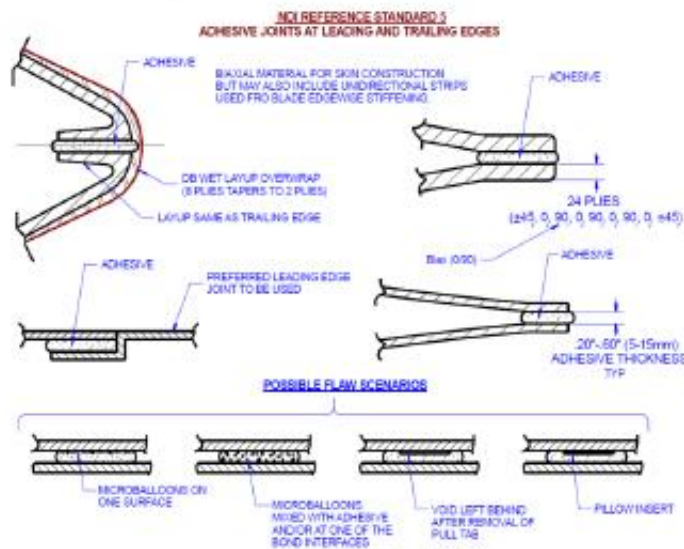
Element of Adhesive Joint in Trailing Edge NDI Test Specimens
